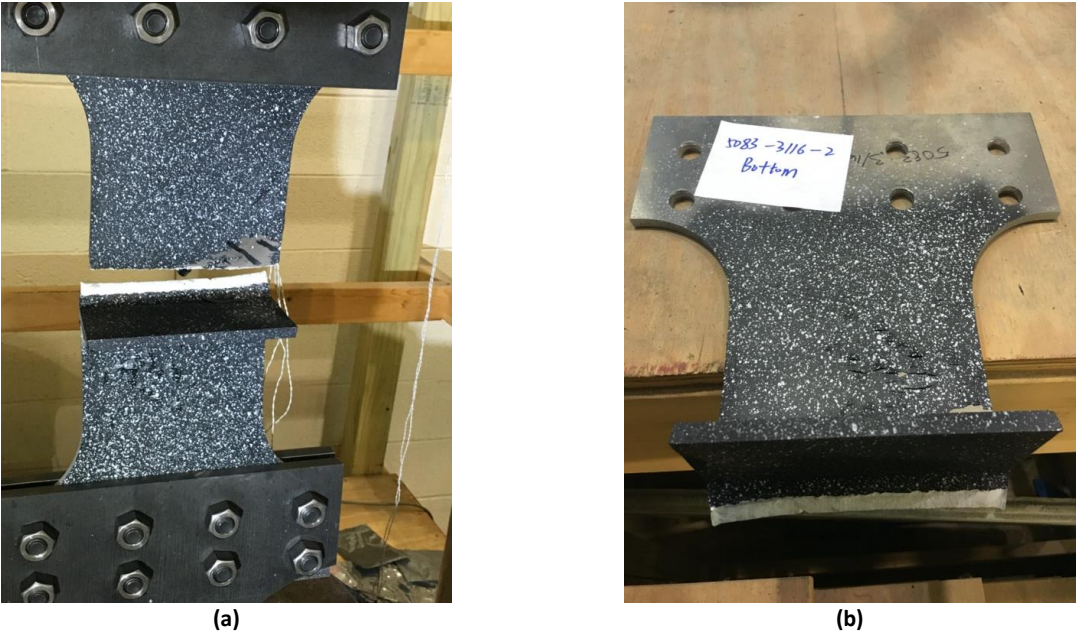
Specimen A2 Showing Failure at Weld Toe
